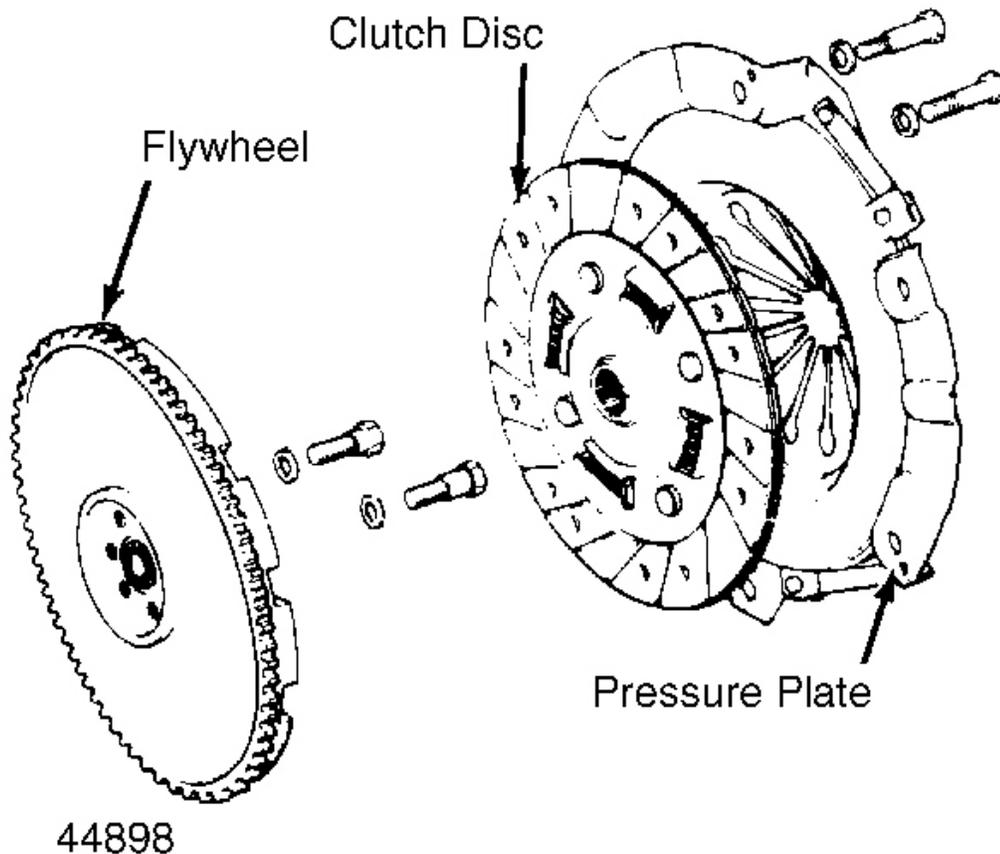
Exploded View Of Clutch Assembly (Typical)
